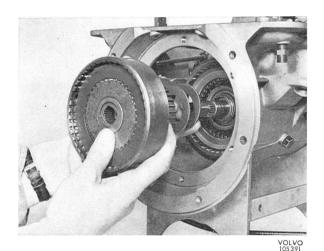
Installation sequence, front clutch cylinder, thrust and backing washers
